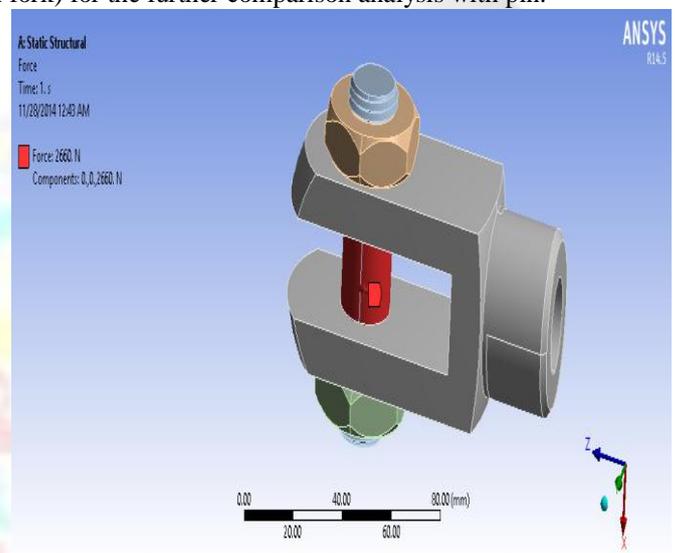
ANSYS analysis of screw nut fork assembly (Loading)
